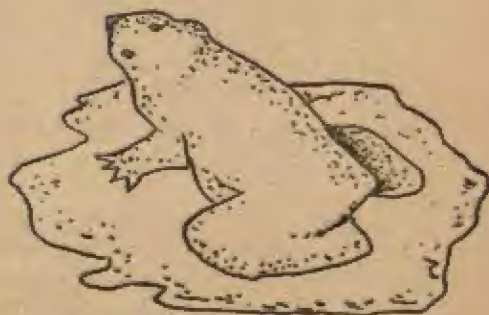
RUBBER MOULD OF FROG REMOVED FROM PLASTER JACKET.
